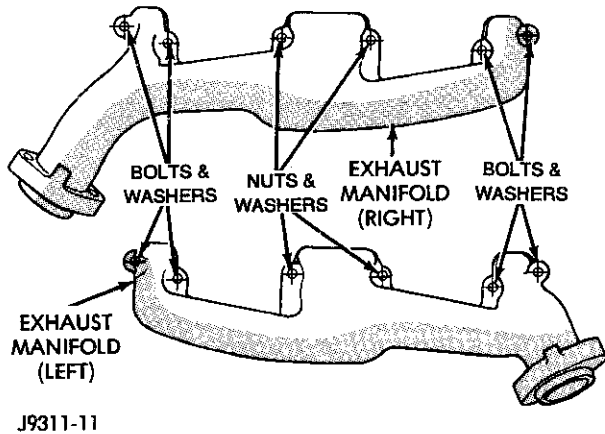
Engine Exhaust Manifold Installation—5.2L/5.9L Engines
